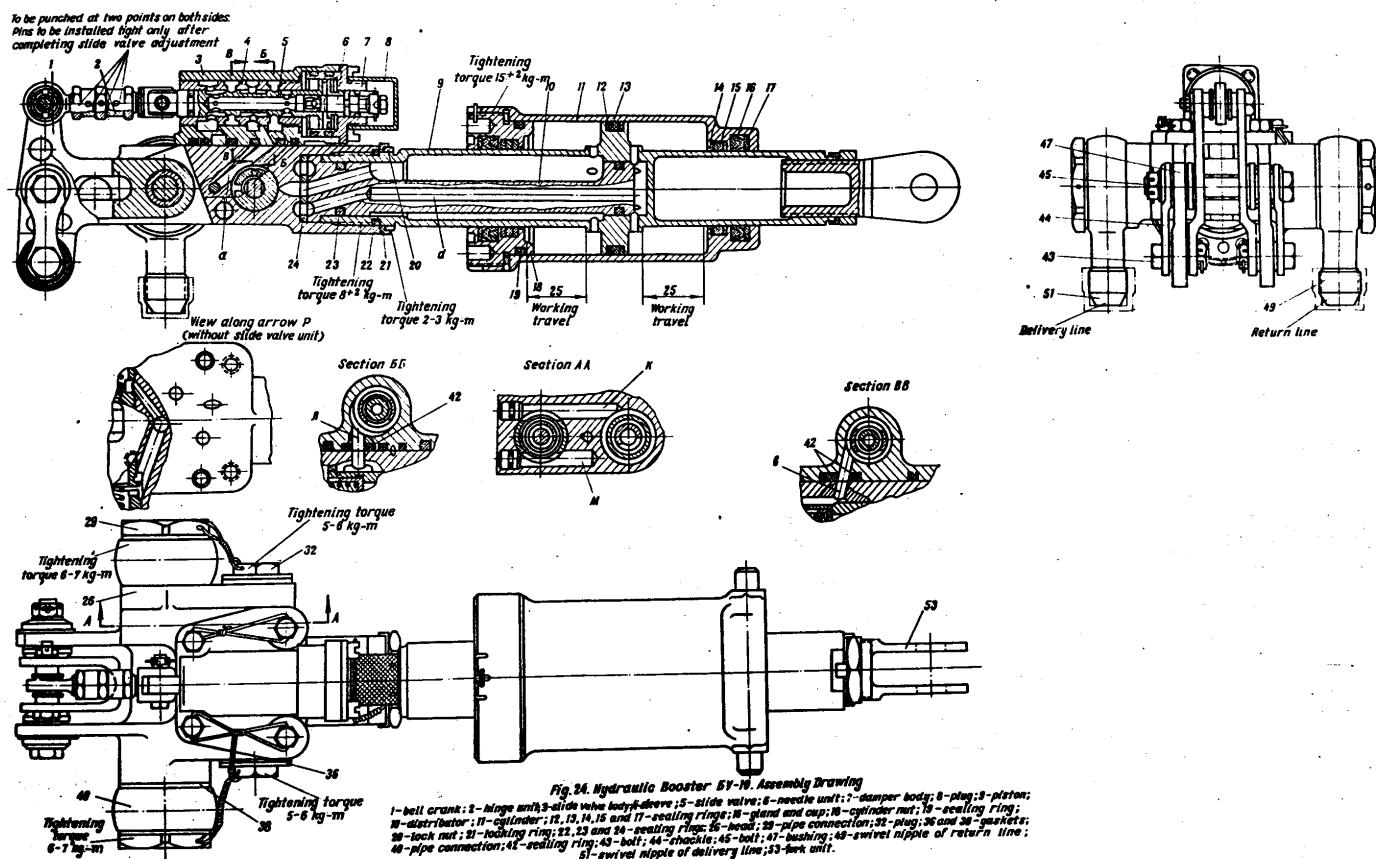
Hydraulic Booster 5Y-10. Assembly Drawing
